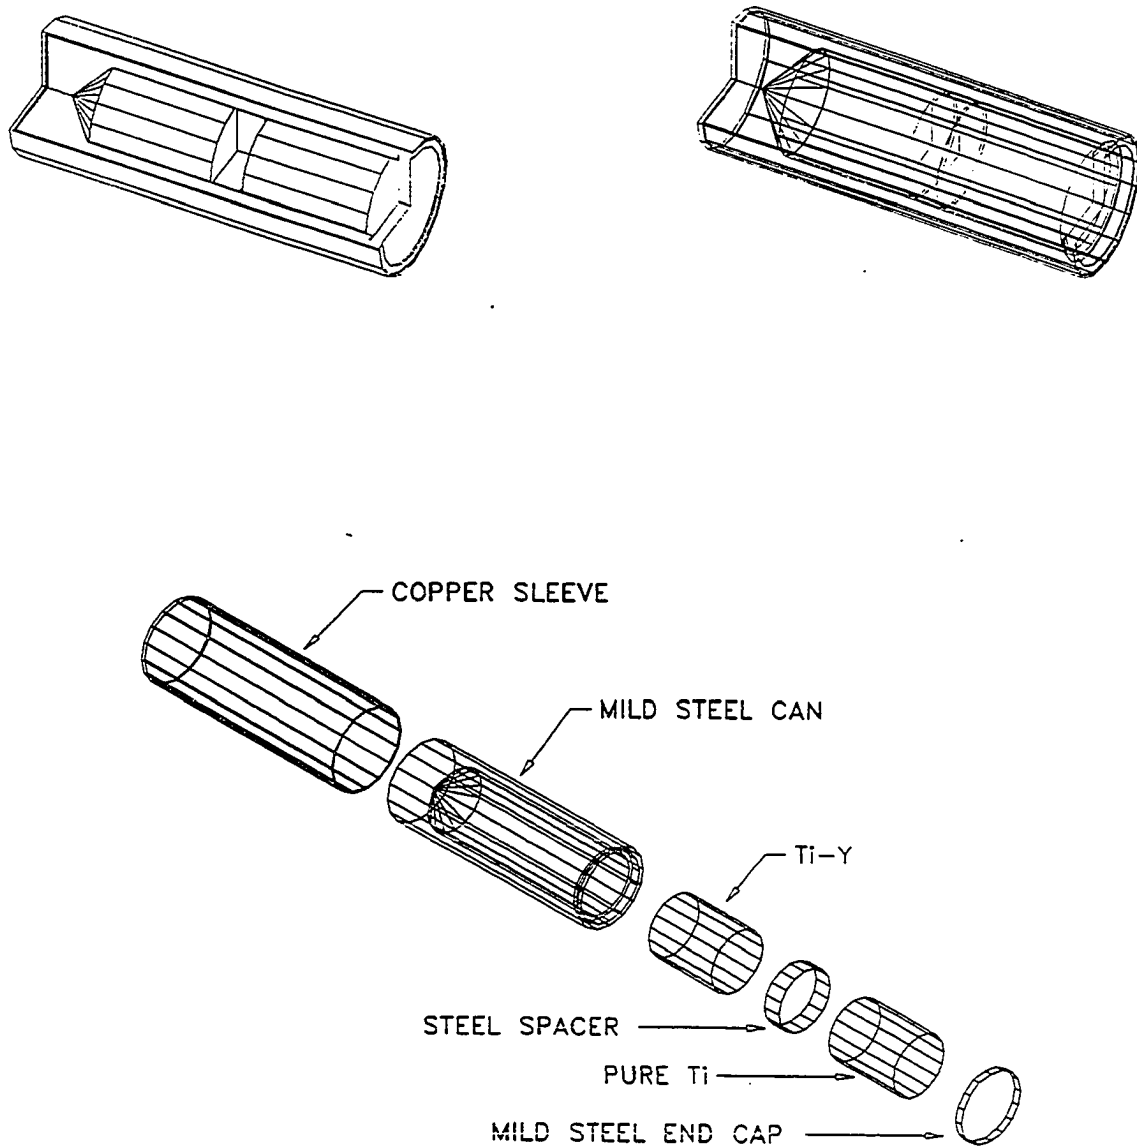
Wire-frame depictions of the extrusion can assembly for Ti-20Y and pure Ti ingots shown in pictorial half section views with and without hidden line removal (top) and in exploded pictorial (bottom). The forward end of the assembly is at left
